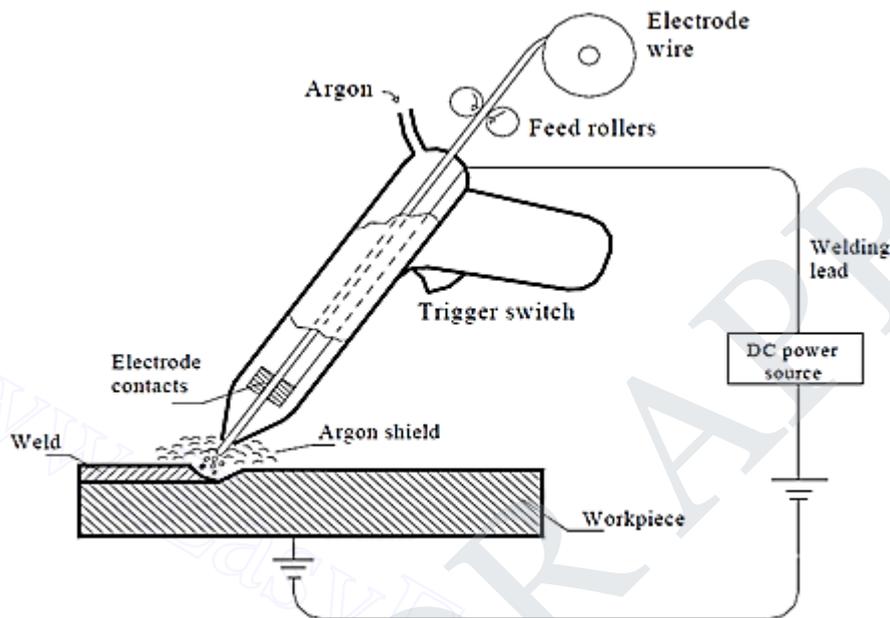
Metal Inert Gas (MIG) Welding
